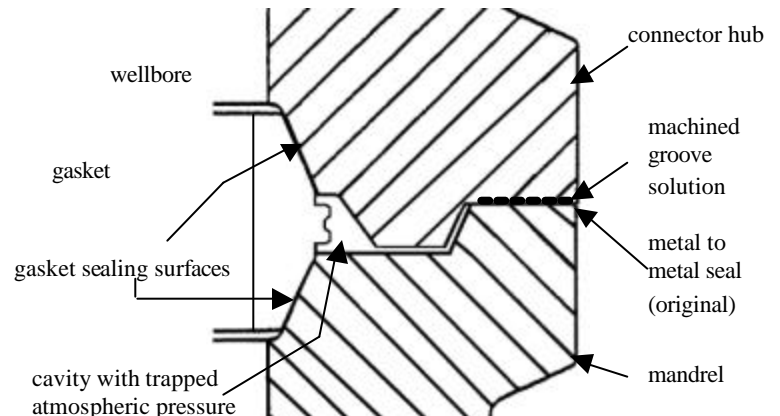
Detail of LMRP connector showing cause of pressure lock and engineered solution
